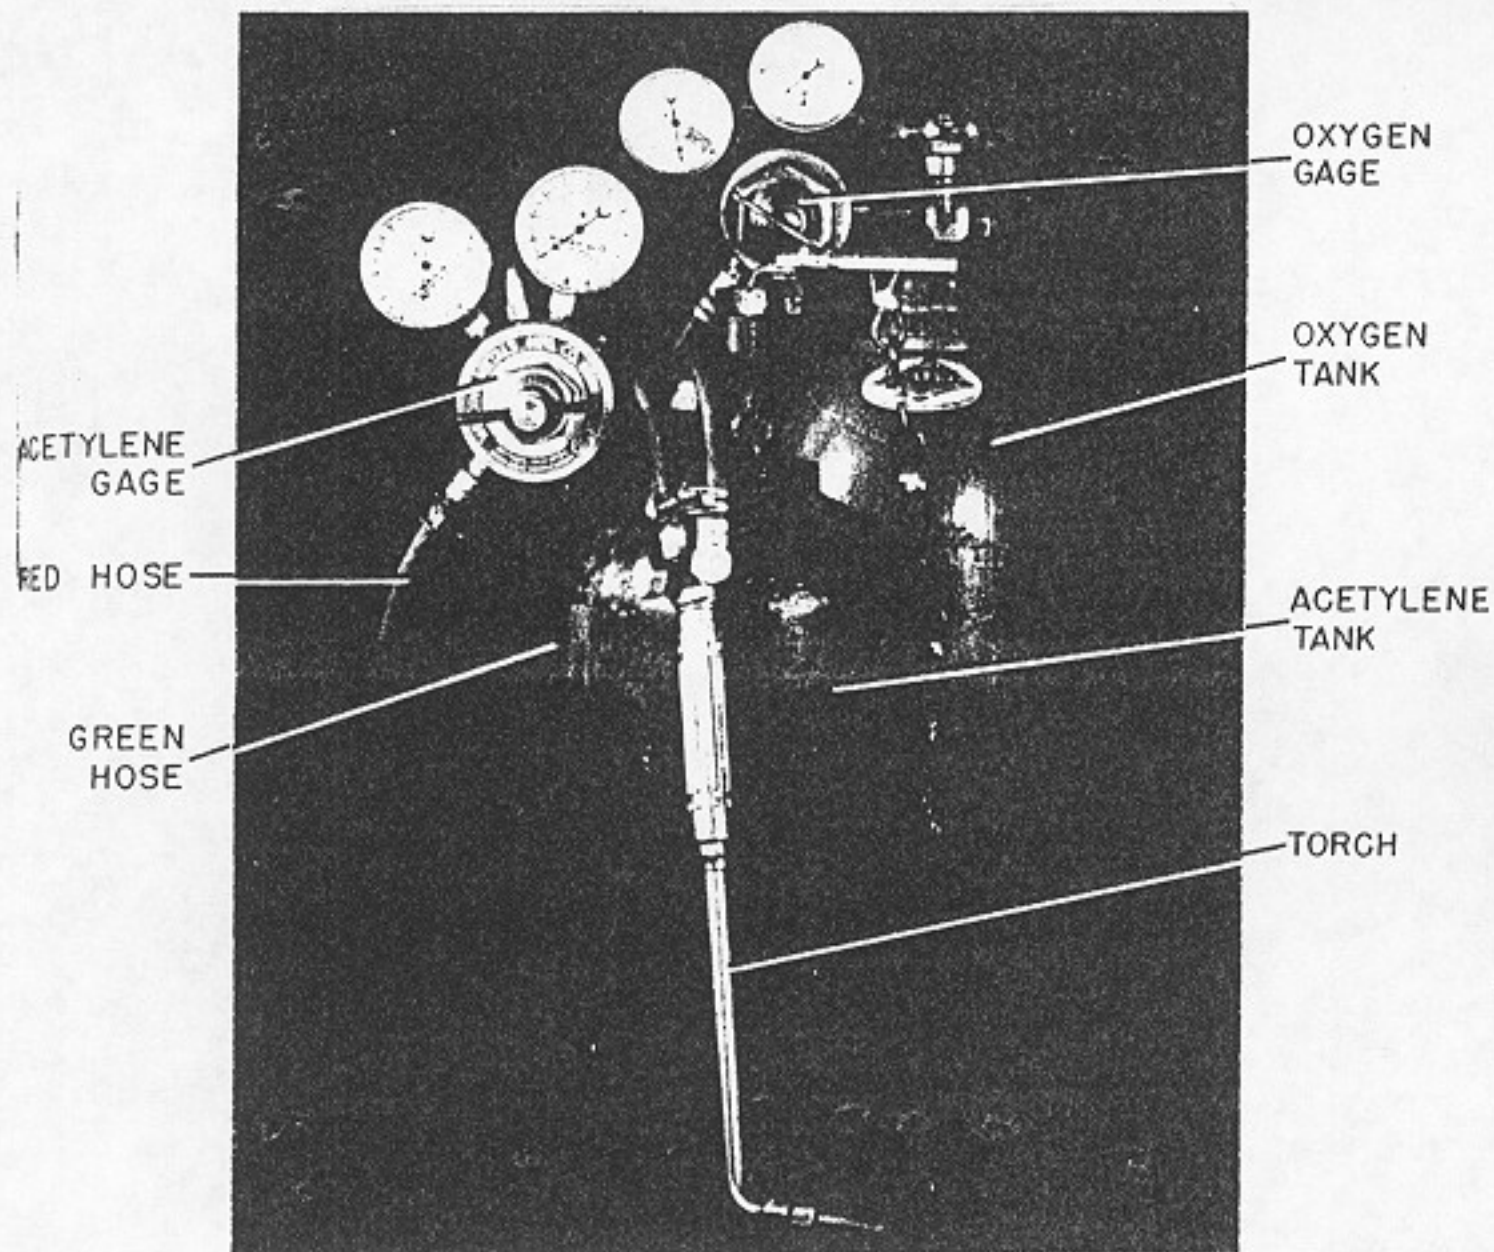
An oxyacetylene welding outfit assembled for welding.
